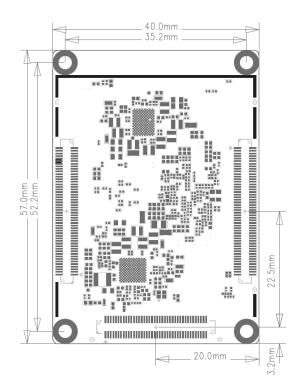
Dimensions for Top View of SOM610 Bottom Side
